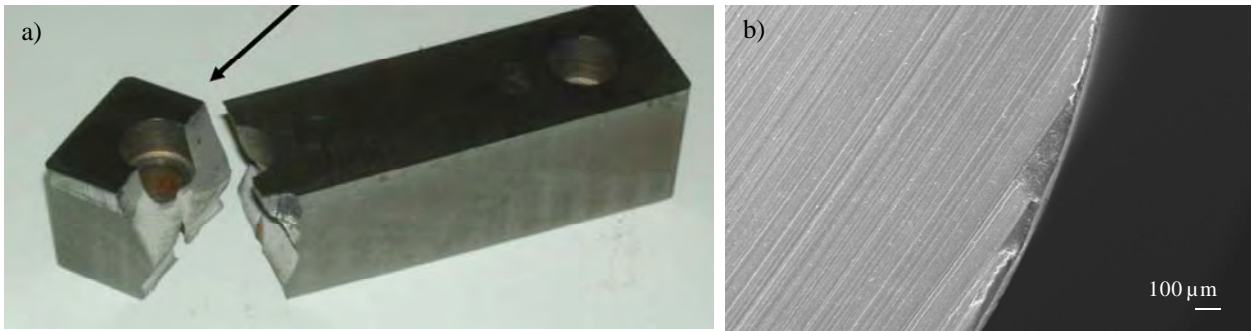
a) Fracture due to the presence of threads; b) fracture due to machining grooves
